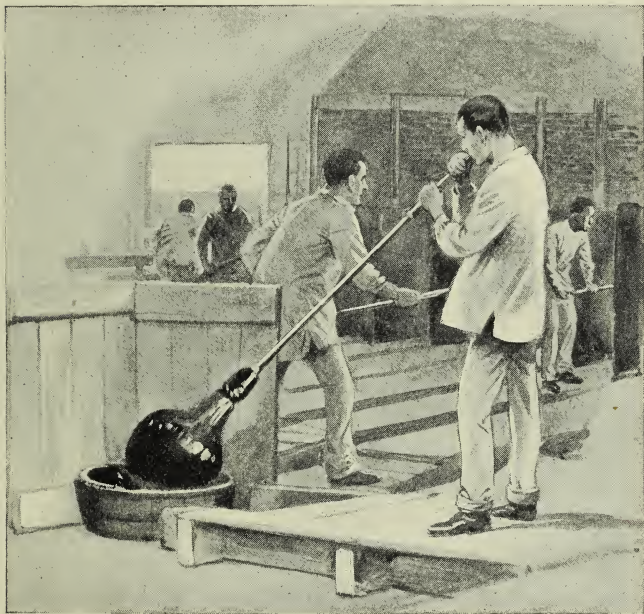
Blowing the Ball for a Glass Cylinder.
